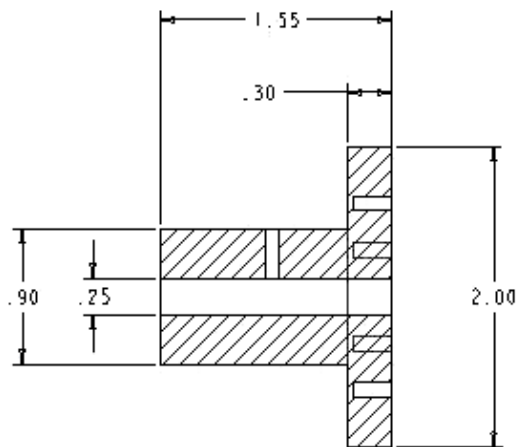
Detailed Left End Piece Drawing (Dimensions in Inches)
